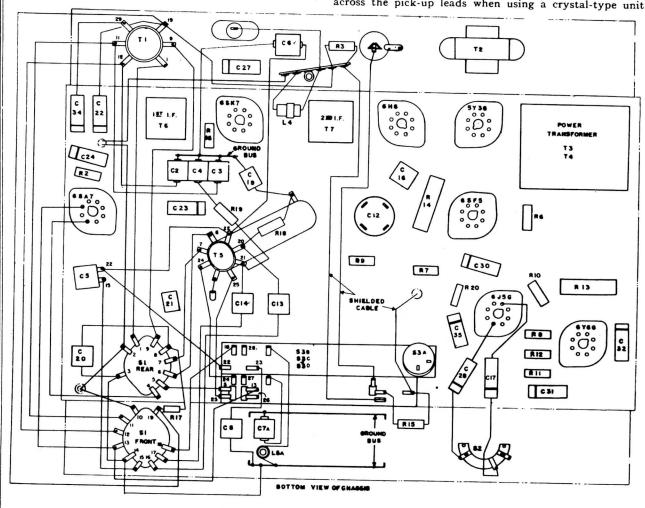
Radio Chassis Parts Layout (Model HM-226-7A only)
